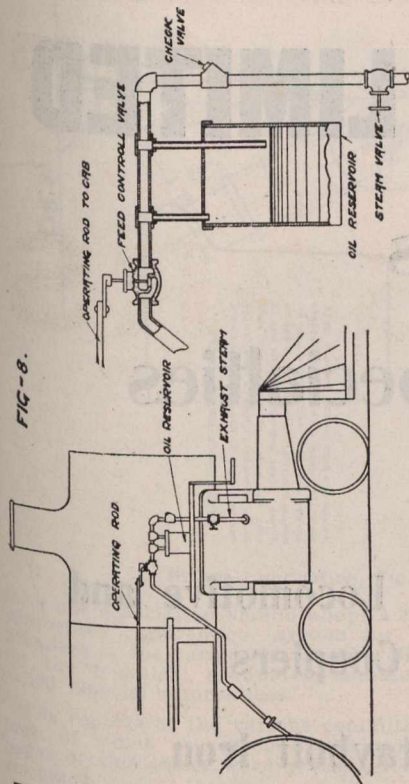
Flange Oiler, C.R.I. & P. Ry.
